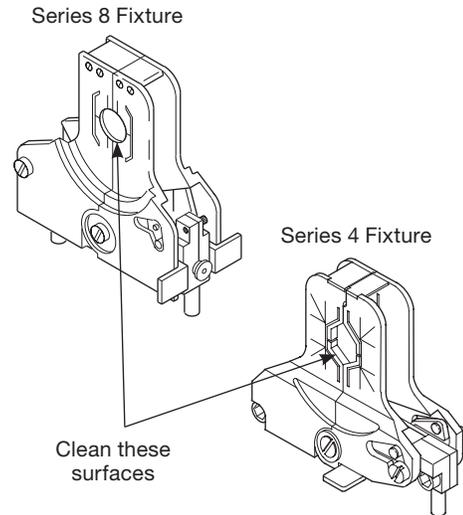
Cleaning the Micro Weld Head Fixtures
